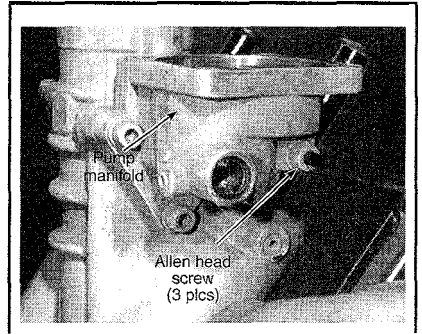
Remove the 3 Allen head screws securing the pump manifold assembly
